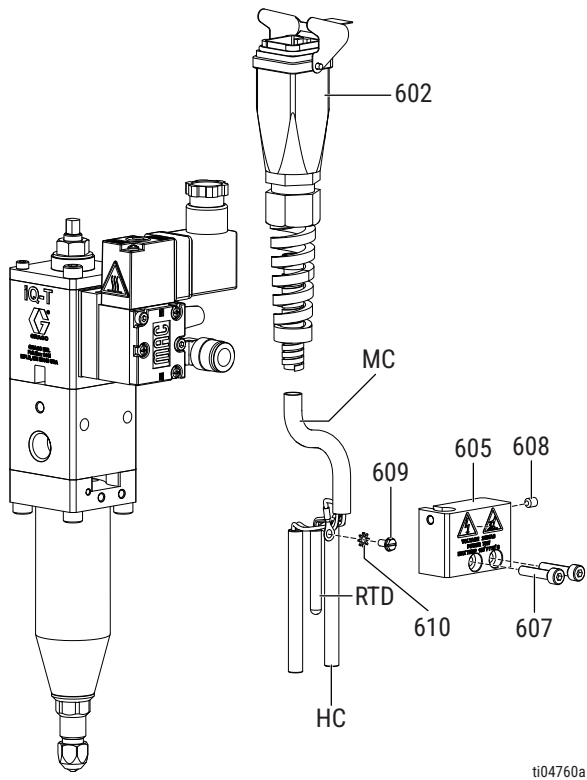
Heater Assembly for 60 mm Outlet Block
